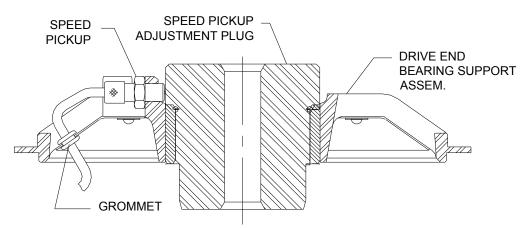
Assembling Grommet, Speed Pickup, and Guard to Drive End End Bell
